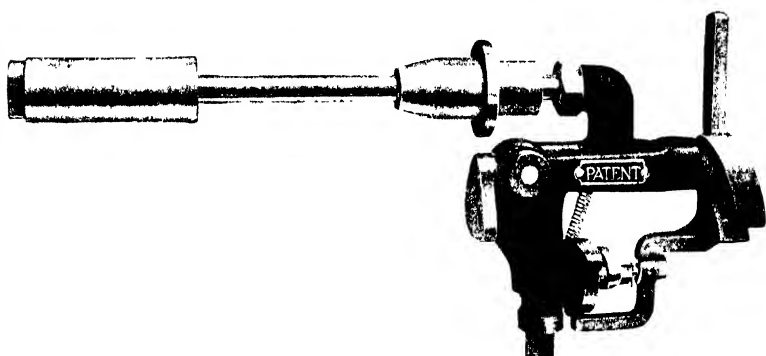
TYPE "F" OIL BURNER WITH SAFETY SHUT-OIL COCK
